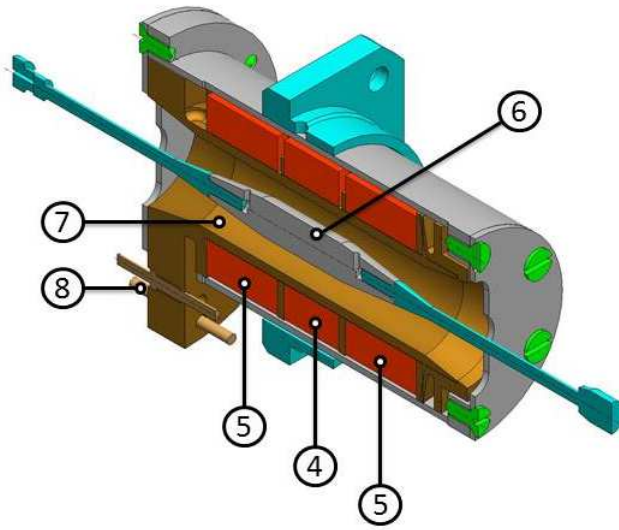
Cross section HIFI-FPC LVDT position sensor; 4 = Primary coil; 5 = Secondary coils; 6 = Stainless steel core; 7 = Vespel support structure; 8 = PhosphorBronze connector pins.
